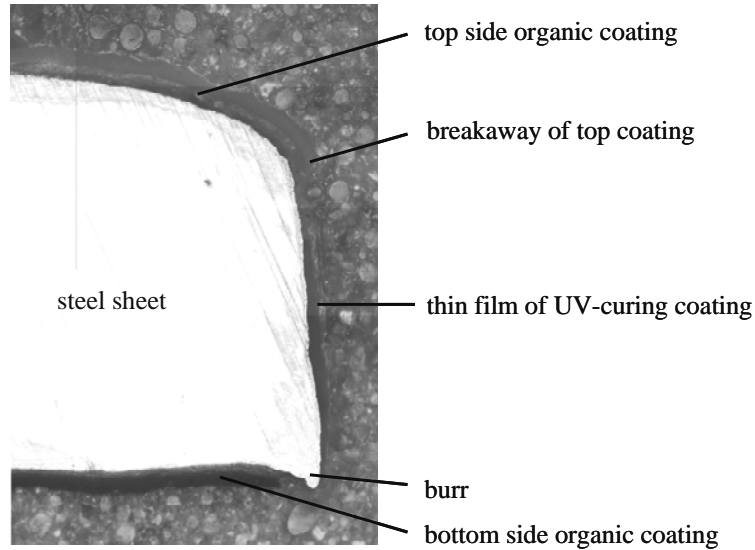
Polished cut image of cut edge of coil coated sheet steel covered by UV-curing lacquer
